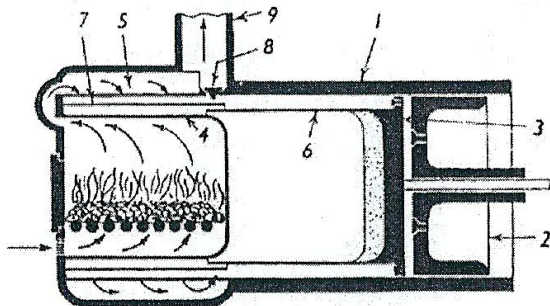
Ericsson engine of 1858; furnace and piston cross-section view (*The Engineer*, 1959)
